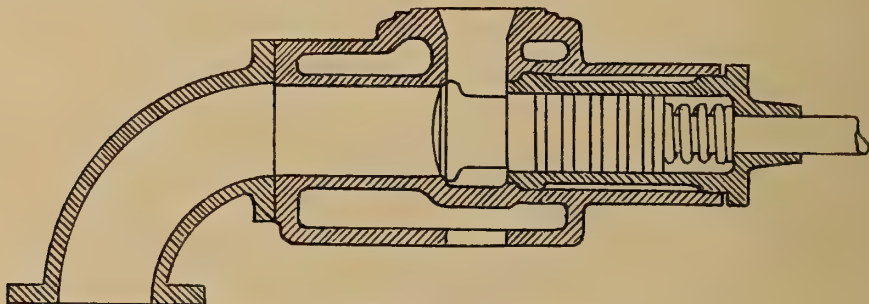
CROSSLEY BALANCED EXHAUST VALVE
